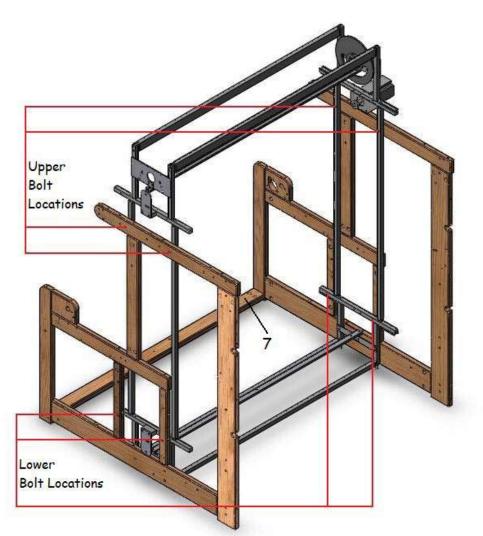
Wood and Module Frames with Connecting Bolts (DAS Assemblies not shown)
